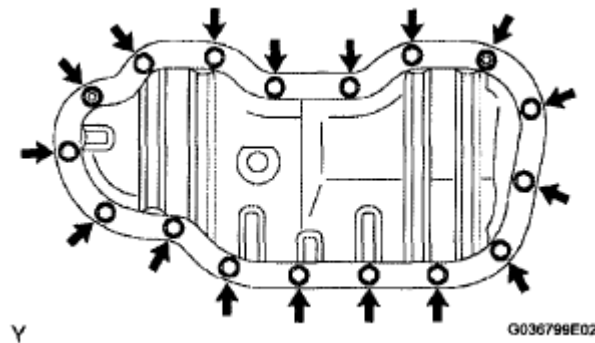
Identifying Oil Pan Seal Packing Area
